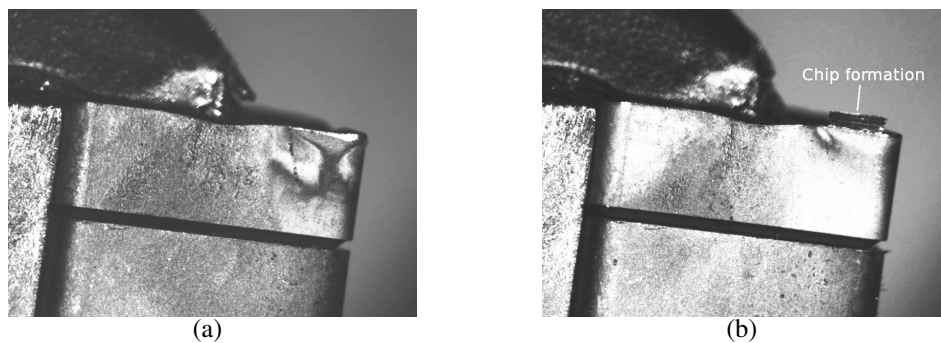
(a) Clear tool wear zone; (b) Tool wear zone affected by chip formation.
